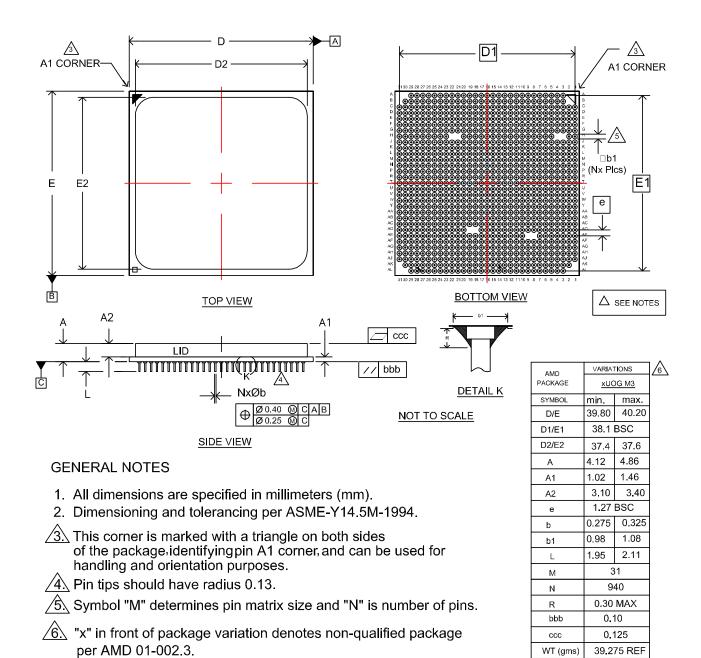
AMD 940-Pin Organic μPGA Package Drawing
